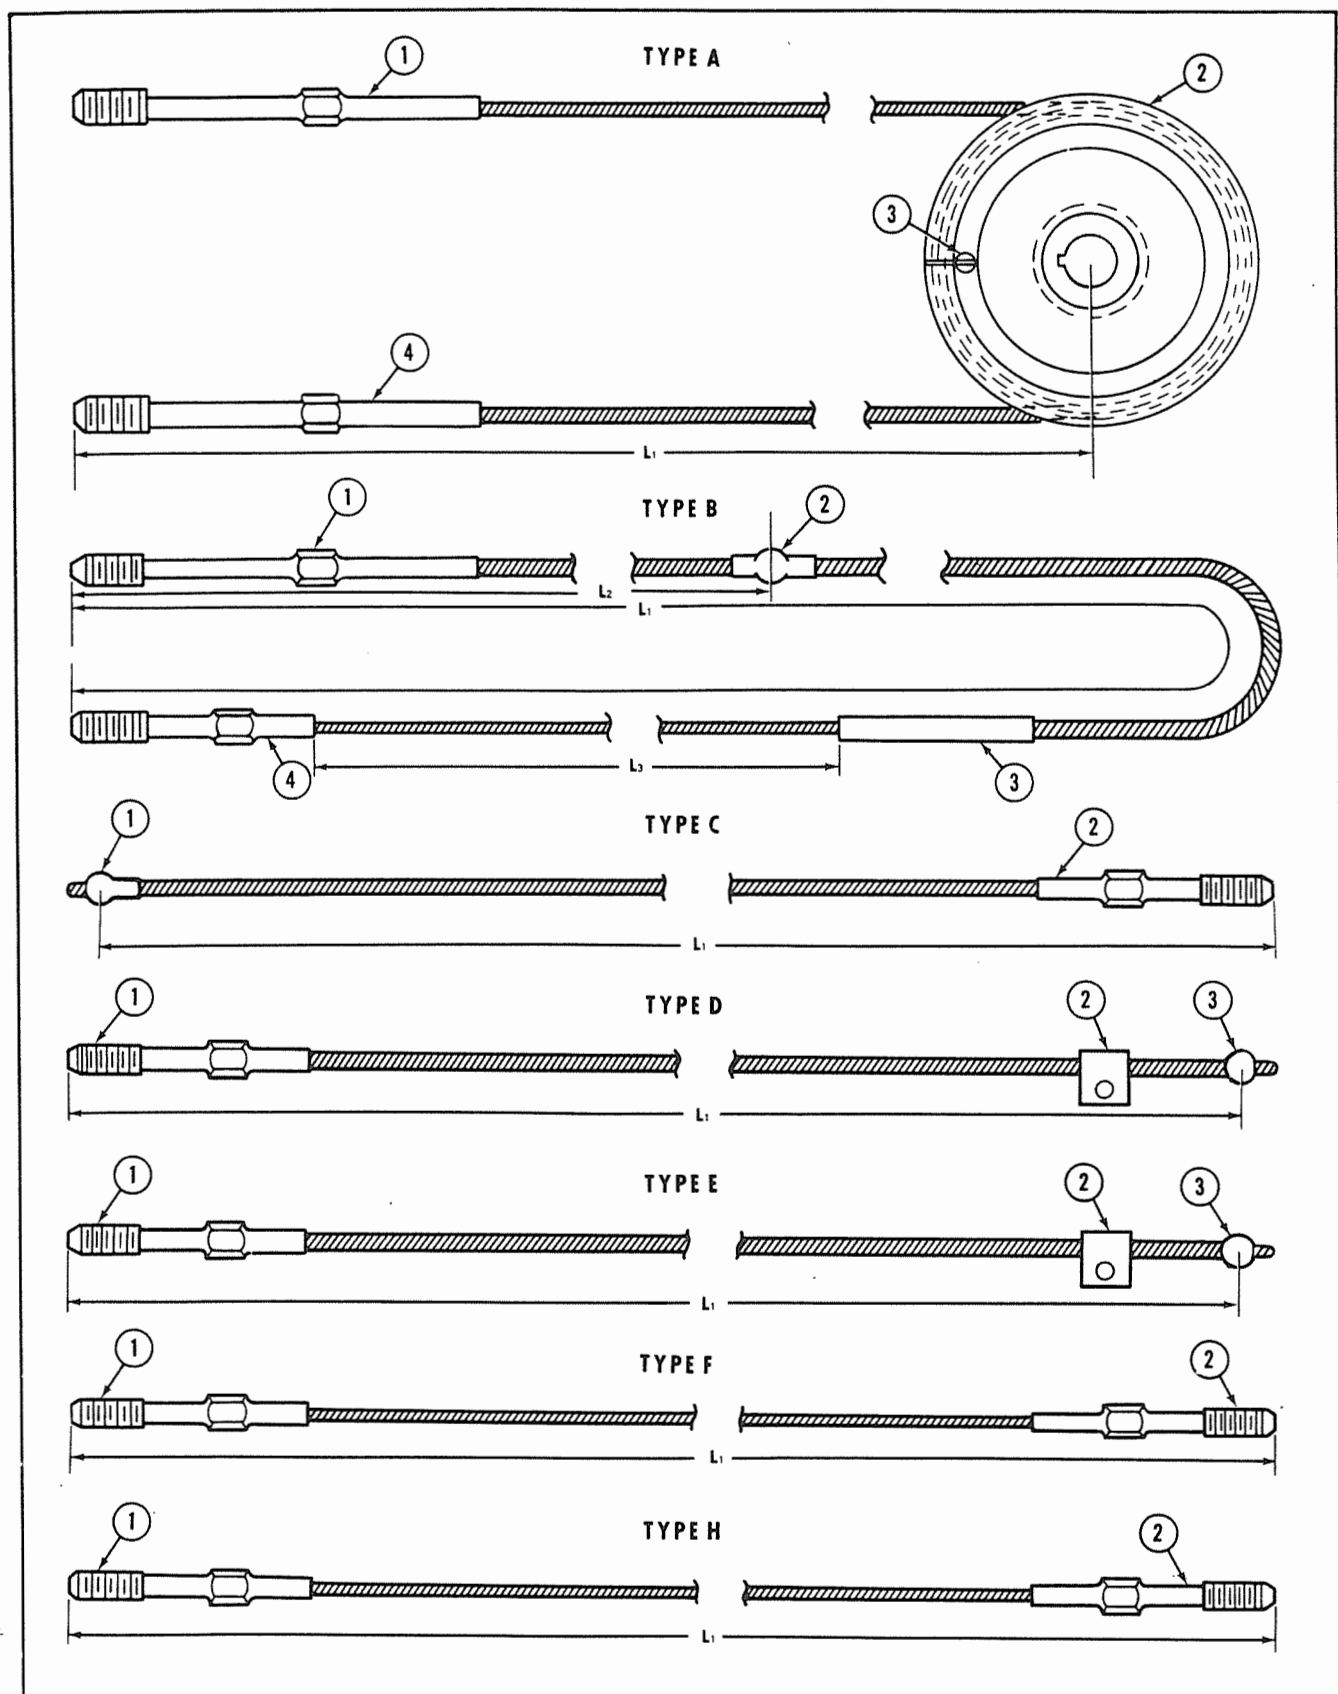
(Sheet 9 of 9 Sheets). Elevator Trim Tab Control System – Cable Assemblies
